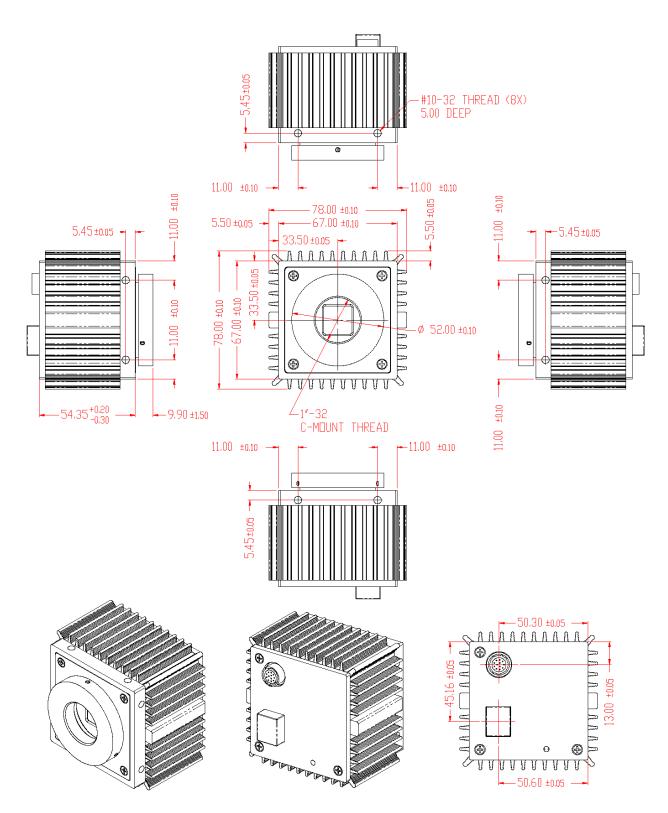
IPX-1M48-G (Black Body) Dimensional Drawings
